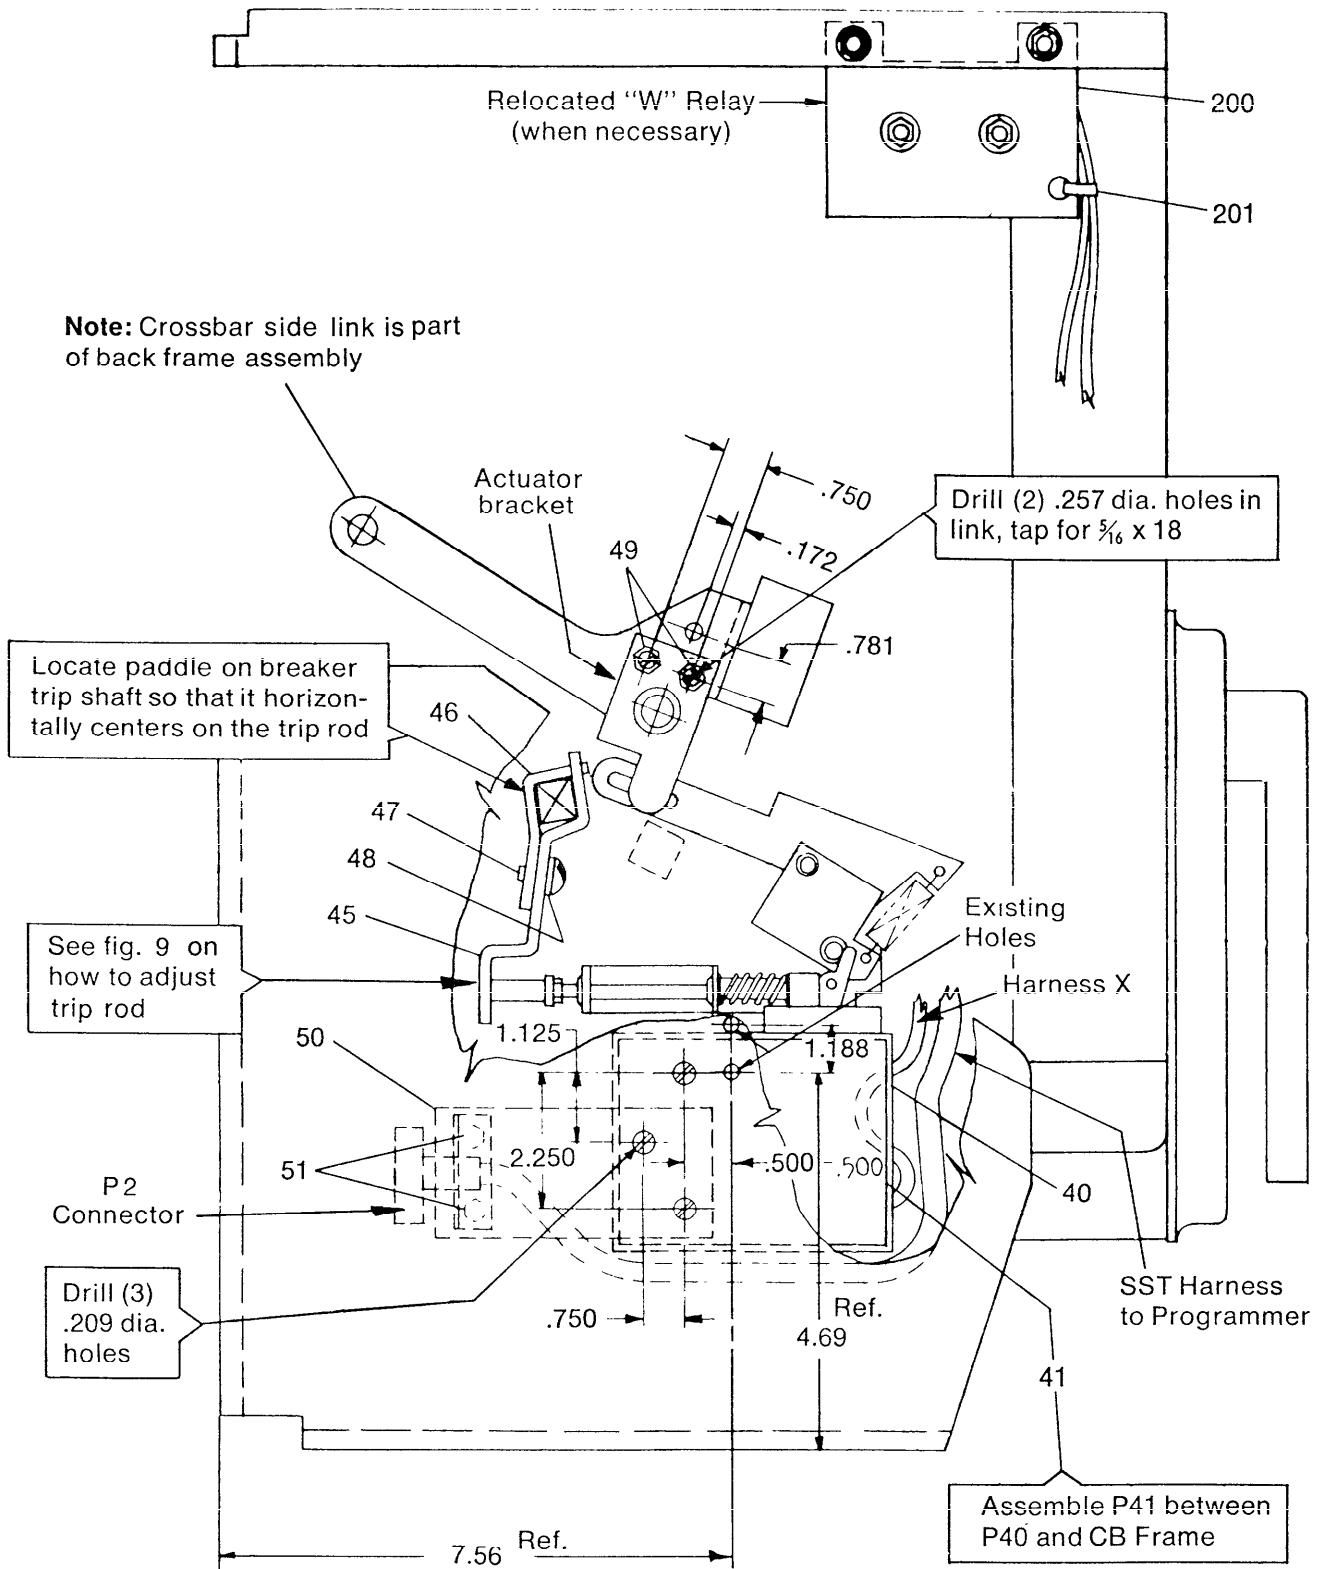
Side view of front frame showing mounting of flux shift trip device.
